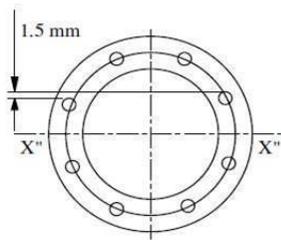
Tolerances for prefabricated piping assemblies
